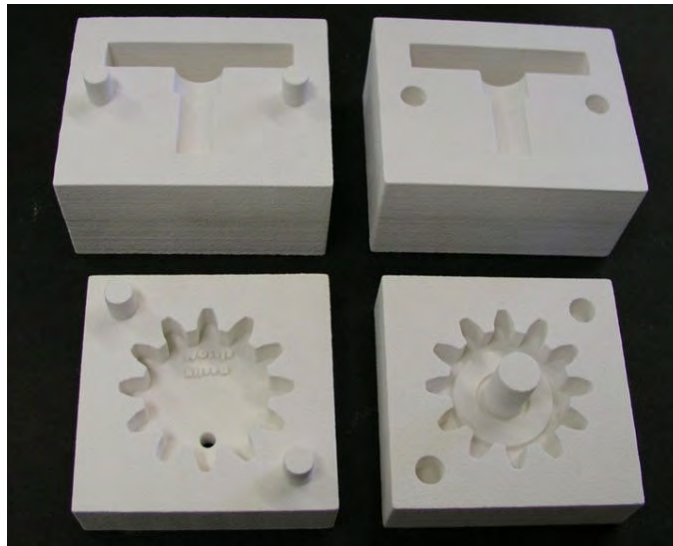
3-D mold of the gear and mounting stand combination set. Note that the gear mold had been modified to include a runner (hole) shown clearly on the bottom left mold
